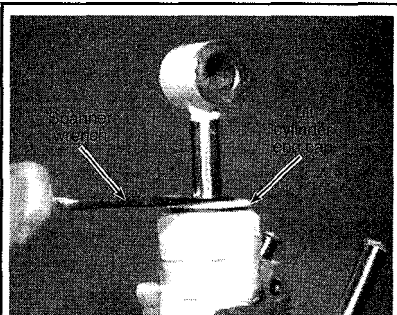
Use a universal spanner to loosen and back the end cap out of the tilt cylinder
